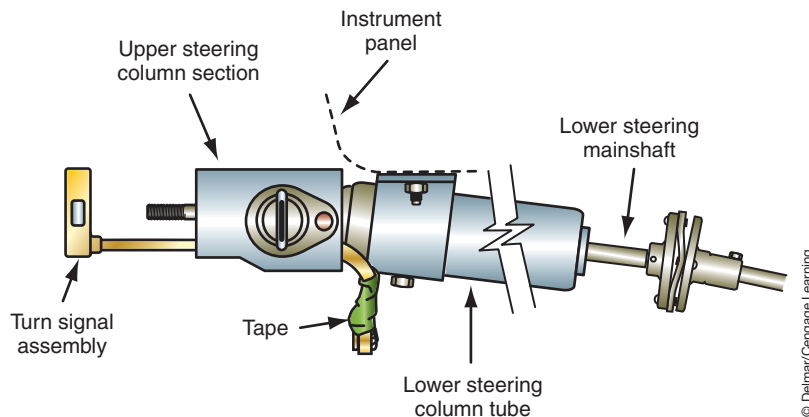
Tape the turn signal connector to make removal easier.
